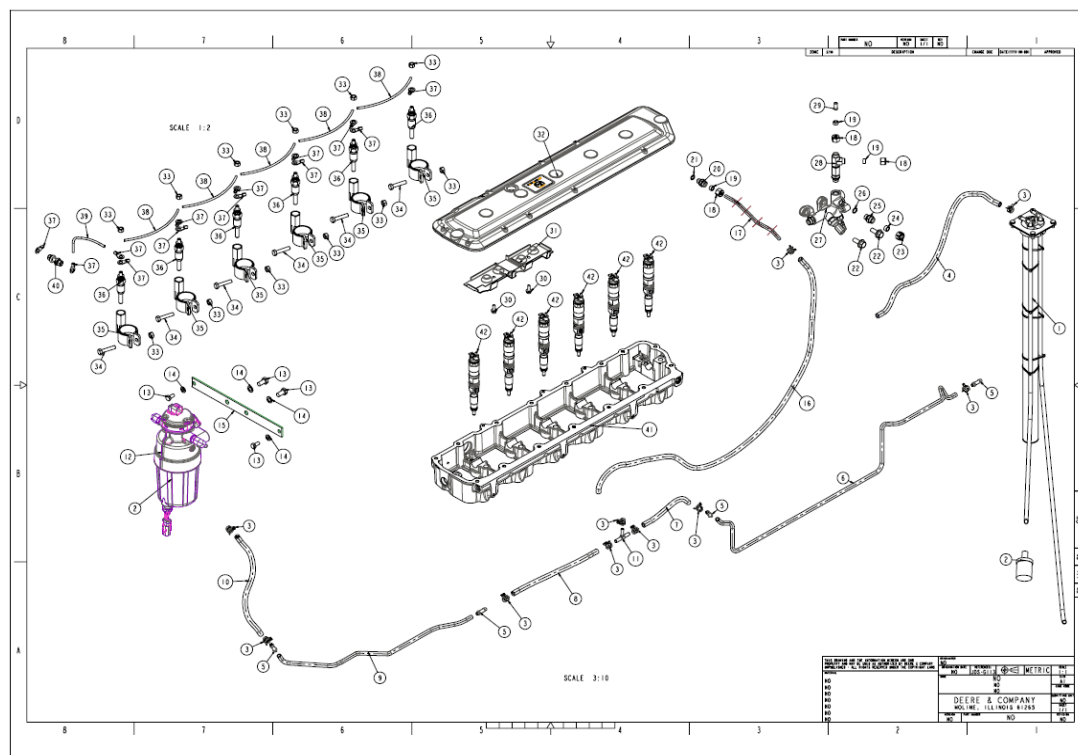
exploded assembly drawing of the preheating system (source: JD)
